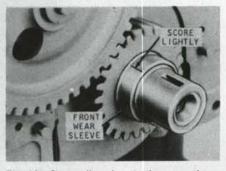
Score oil seal wear sleeve as shown using blunt chisel, then pry from shaft when renewal is indicated.
